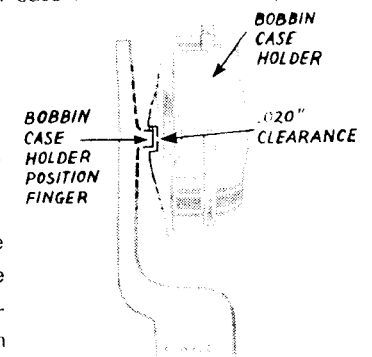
Showing Thread Clearance Between Bobbin Case Position Finger and Bobbin Case Holder
